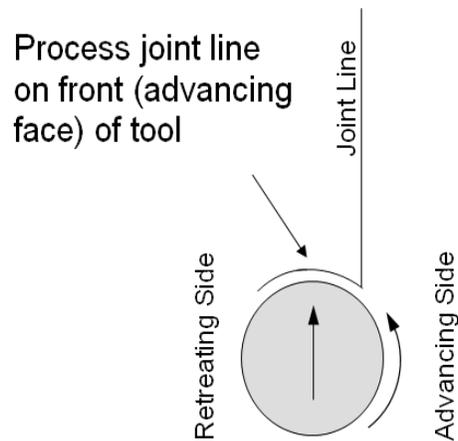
Cross section view of the swept volume of an FSW tool probe at nominally the mid-plane of a butt joint during FSW
